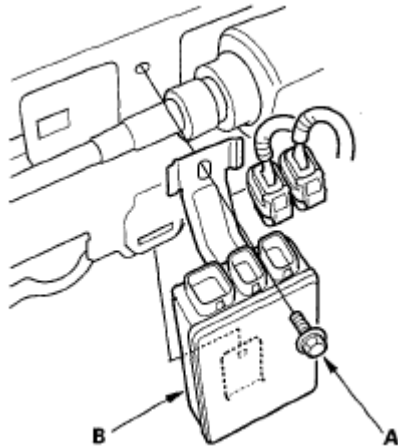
Identifying Front Passenger's Weight Sensor Unit And Fastener
